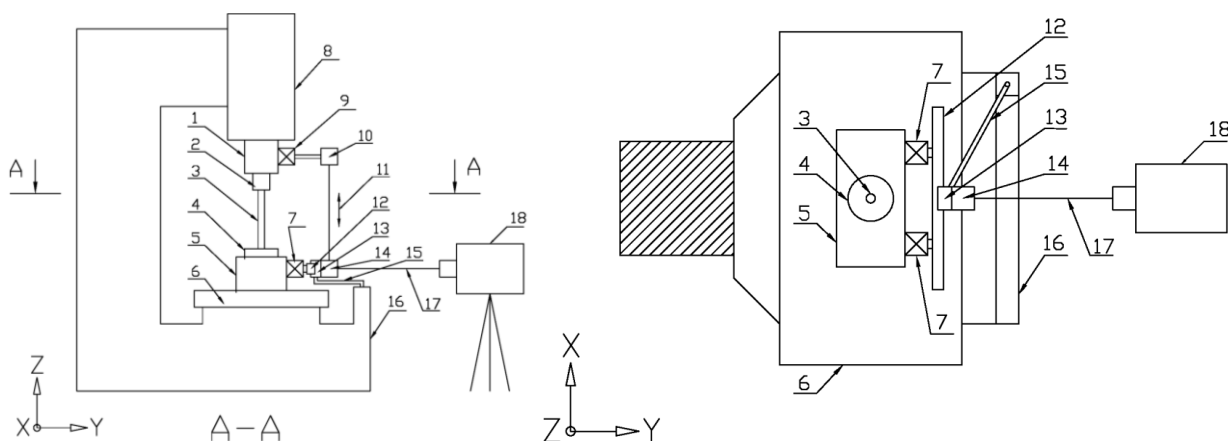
Schematic of device for measuring vibrations in the tool-workpiece system: 1- spindle body, 2 - spindle, 3 - tool holder, 4 - milling head, 5 - workpiece, 6 - table, 7 - magnetic base, 8 - headstock, 9 - magnetic base, 10 - linear reflector, 11 - vibrations in the tool-workpiece system, 12 - rail, 13 - block, 14 - linear interferometer, 15 - link, 16 - machine body, 17 - laser beam, 18 - XL 80 laser (Miko and Nowakowski, 2012).
